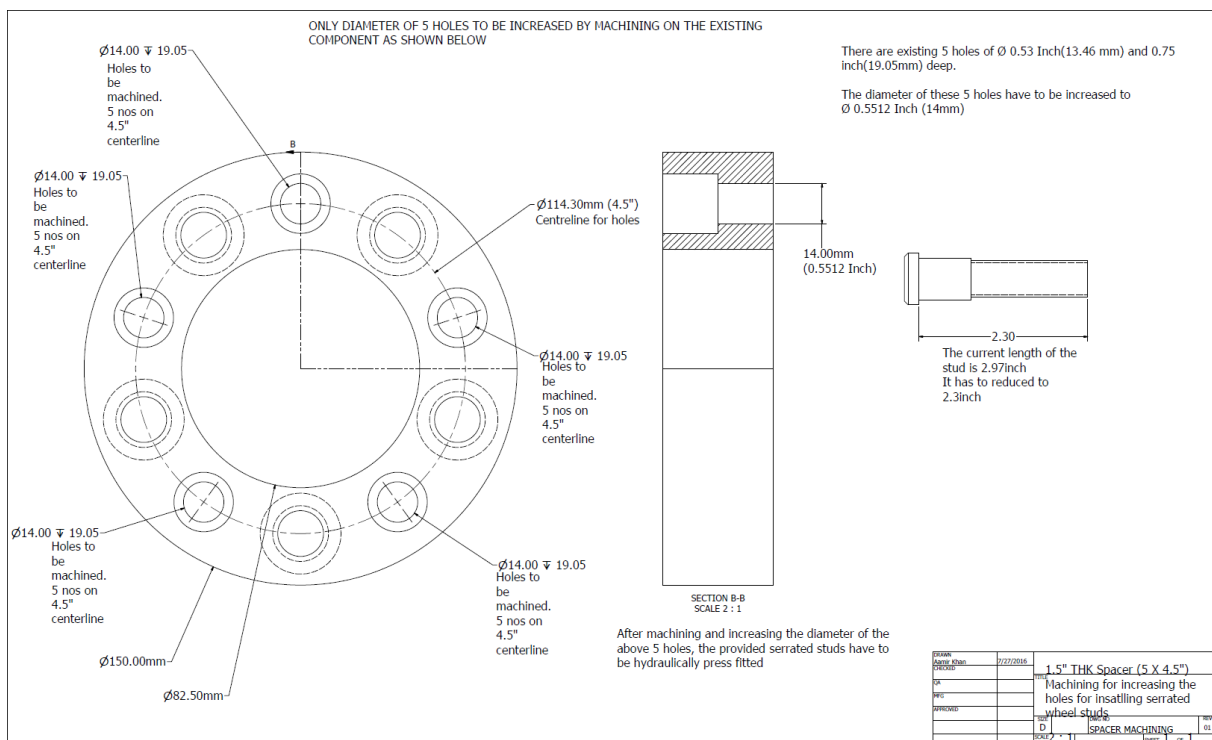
Post procurement machining of wheel spacer and wheel stud.
